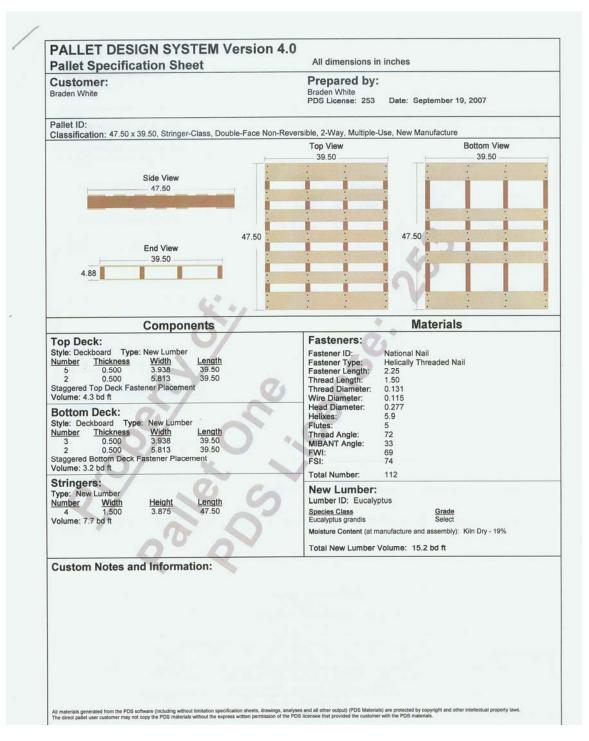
Light duty 4 stringer pallet design details (used with permission of PalletOne).
